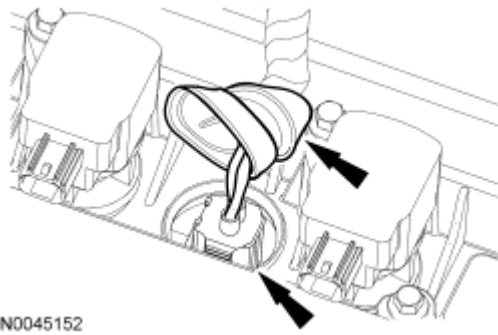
Locating Cylinder Head Temperature (CHT) Sensor Electrical Connector And Boot
